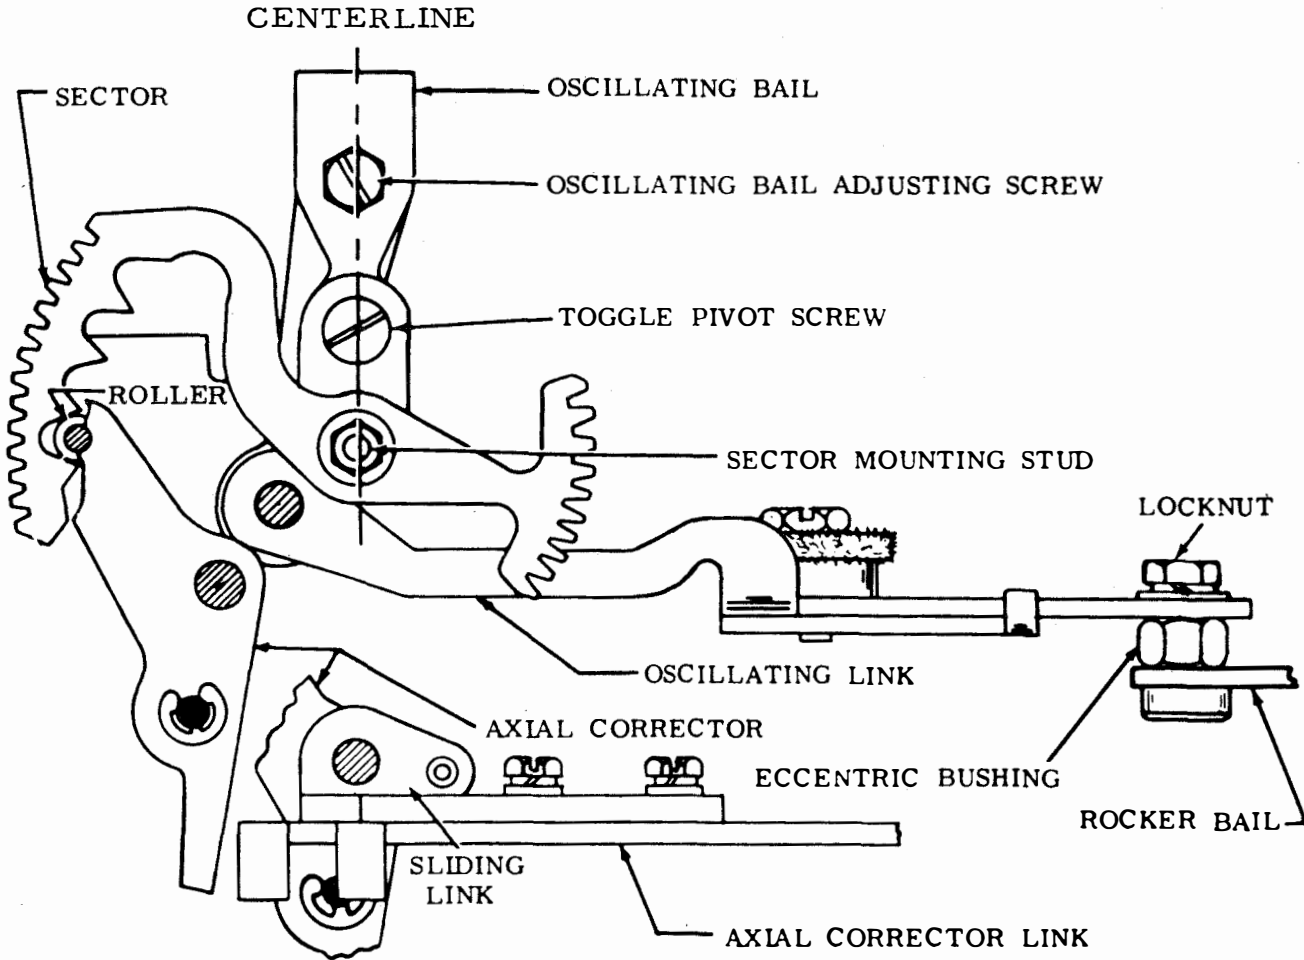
Oscillating Bail Drive Link and Pivot, Top View
